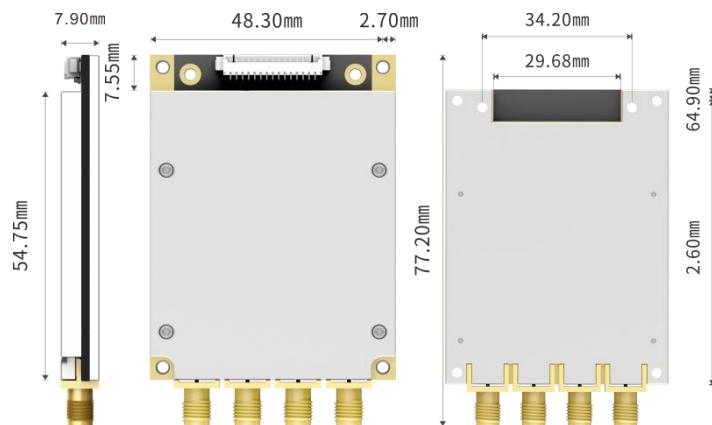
b Multi-Channel Module (CM710-4) Appearance and Dimension
